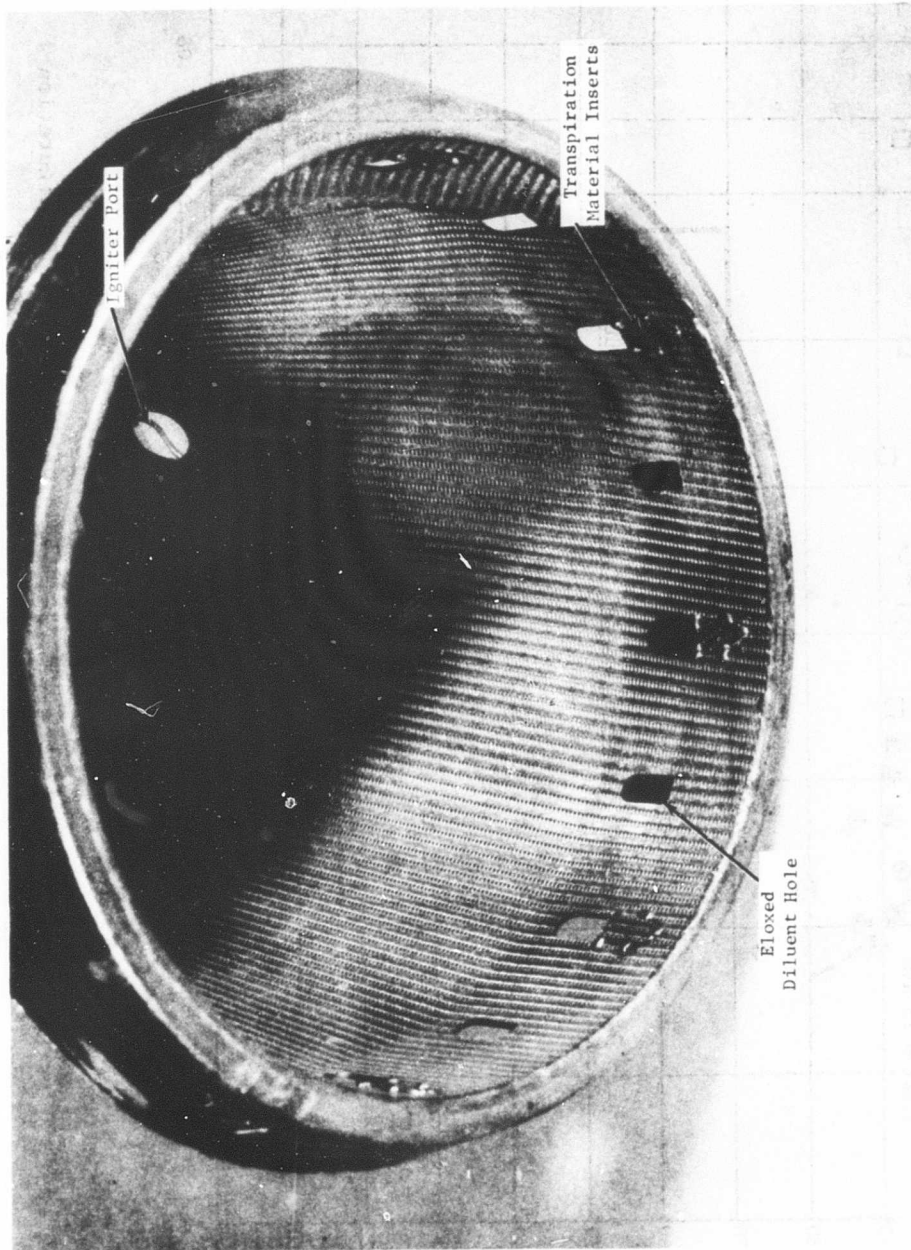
Revised Diluent Slot Geometry On Transpirationally Cooled Outer Liner.
